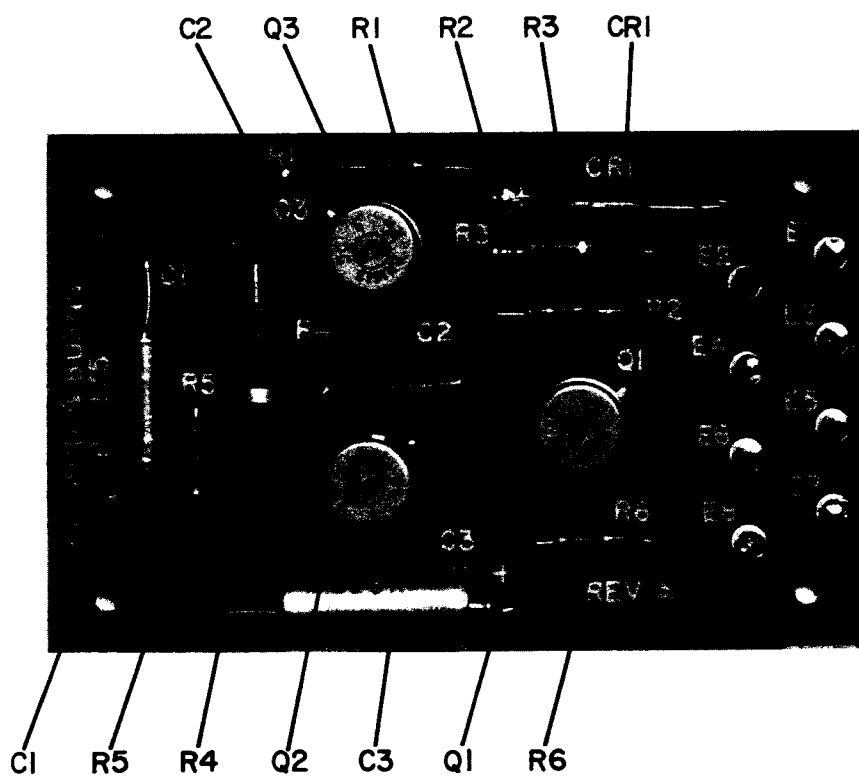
PC-175 CIRCUIT BOARD - PARTS LOCATION
